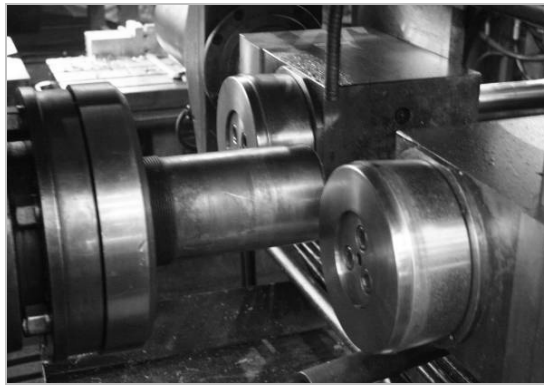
A flow forming machine with the tools-for elongating flow forming
